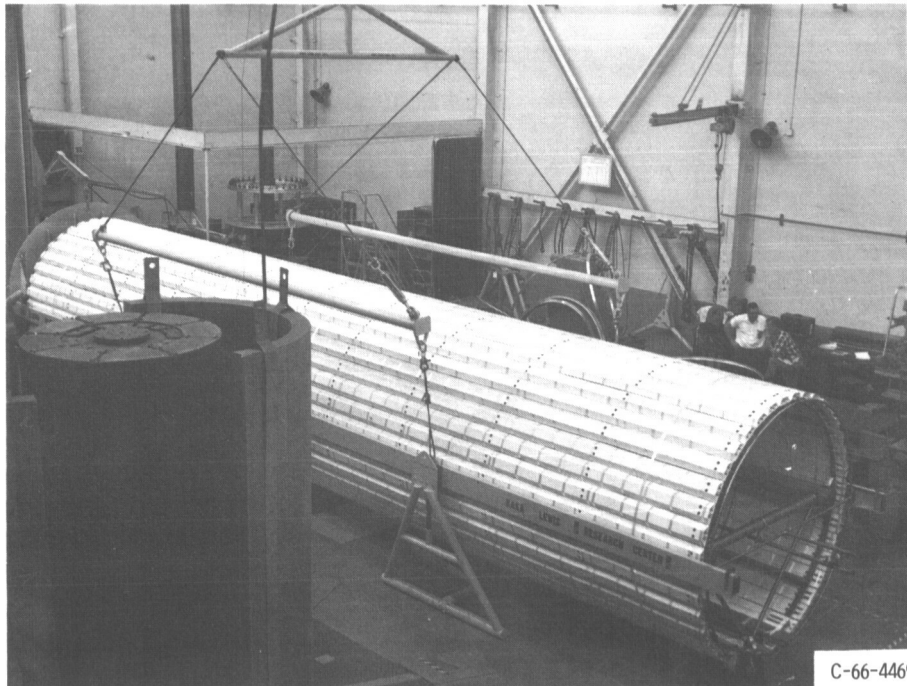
Final radiator assembly on support cradles rigged for lifting.
